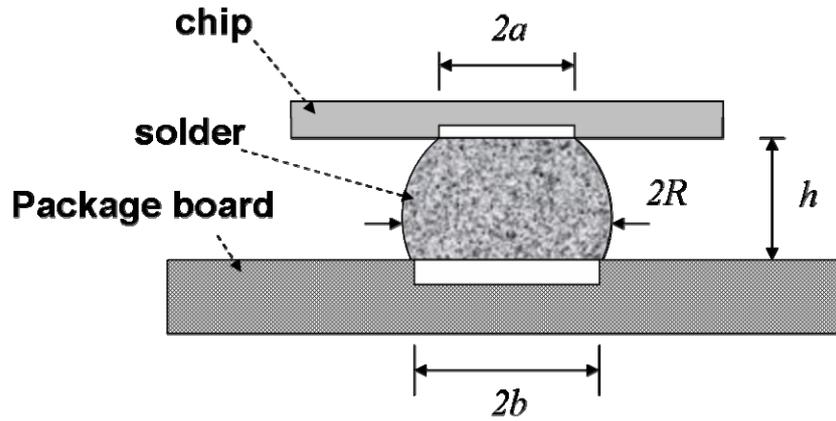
Schematic of double truncated model (DTM) for solder joint
